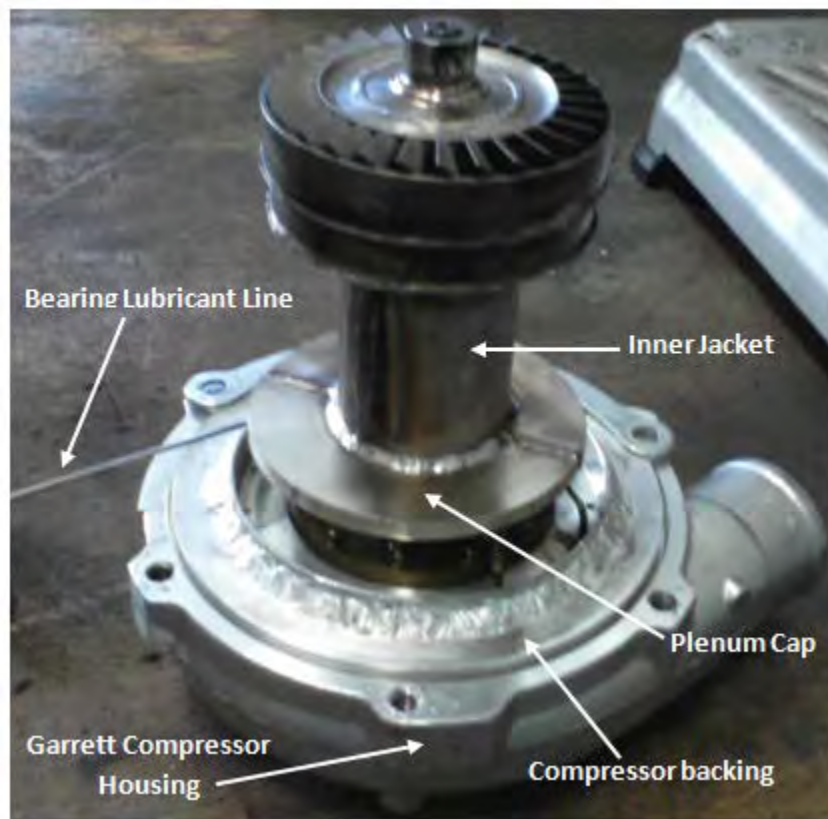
JetCat with the inner jacket, compressor backing, plenum cap, and bearing lubricant line
